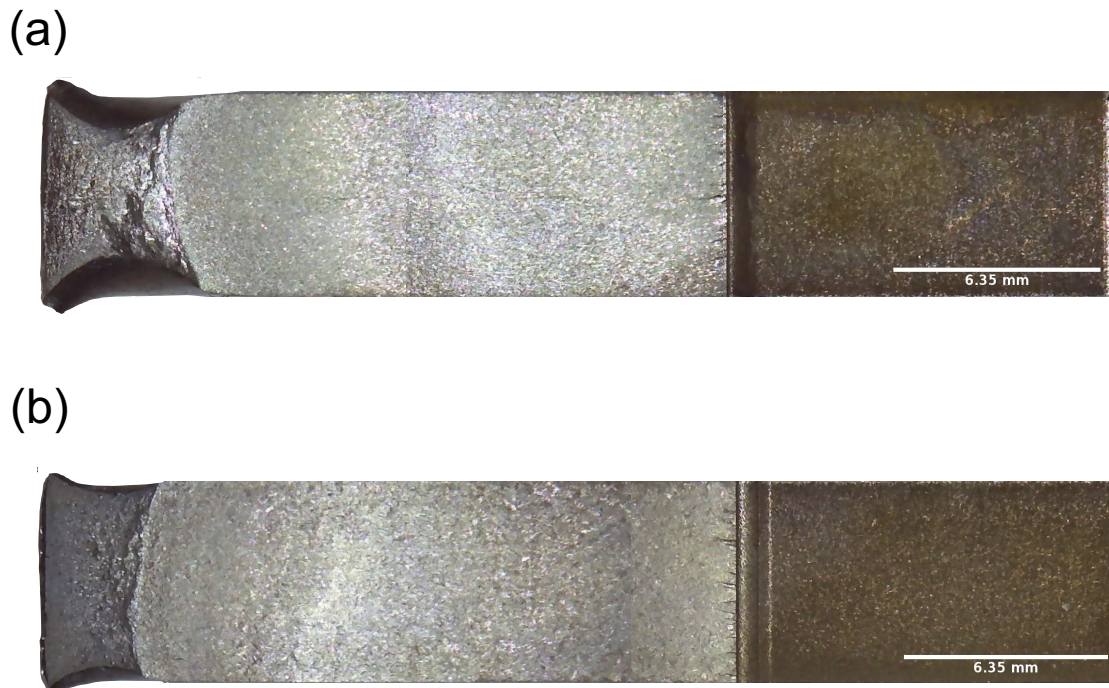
Fracture surfaces of (a) Wrought Type 304/304L (Wrought1) and (b) DED Type 304L (DED1-T).
